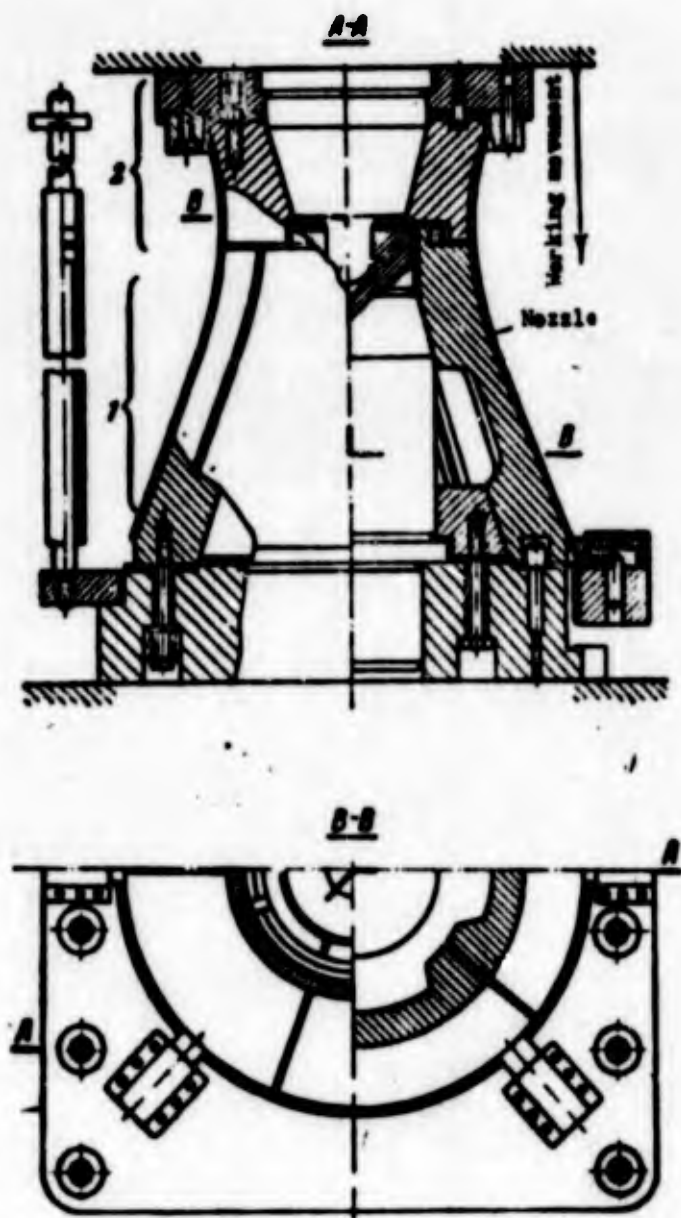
Die for calibration of nozzle after welding.
